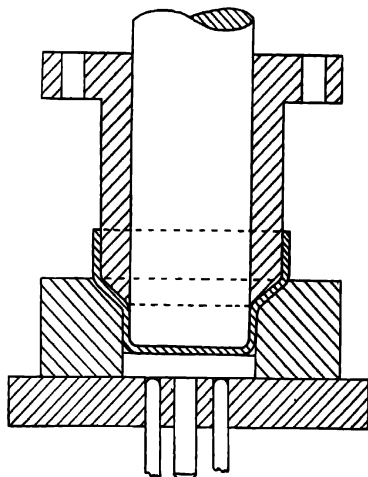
Example of a double-action inside blank-holder type drawing tool
